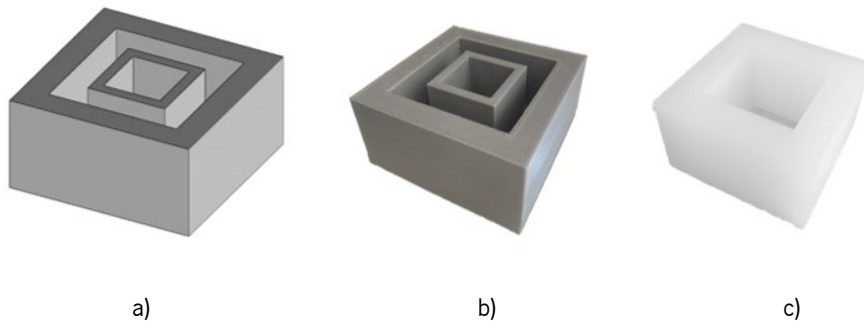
a) CAD model in Solidworks. b) 3D printed plastic mold. c) Silicone mold used to create the ice cube.
